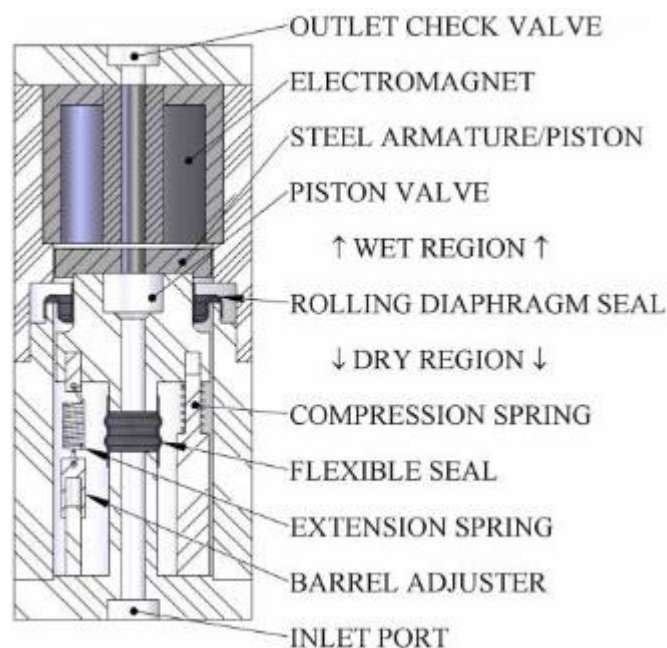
Enclosed linear actuator rod driven pump [6].
